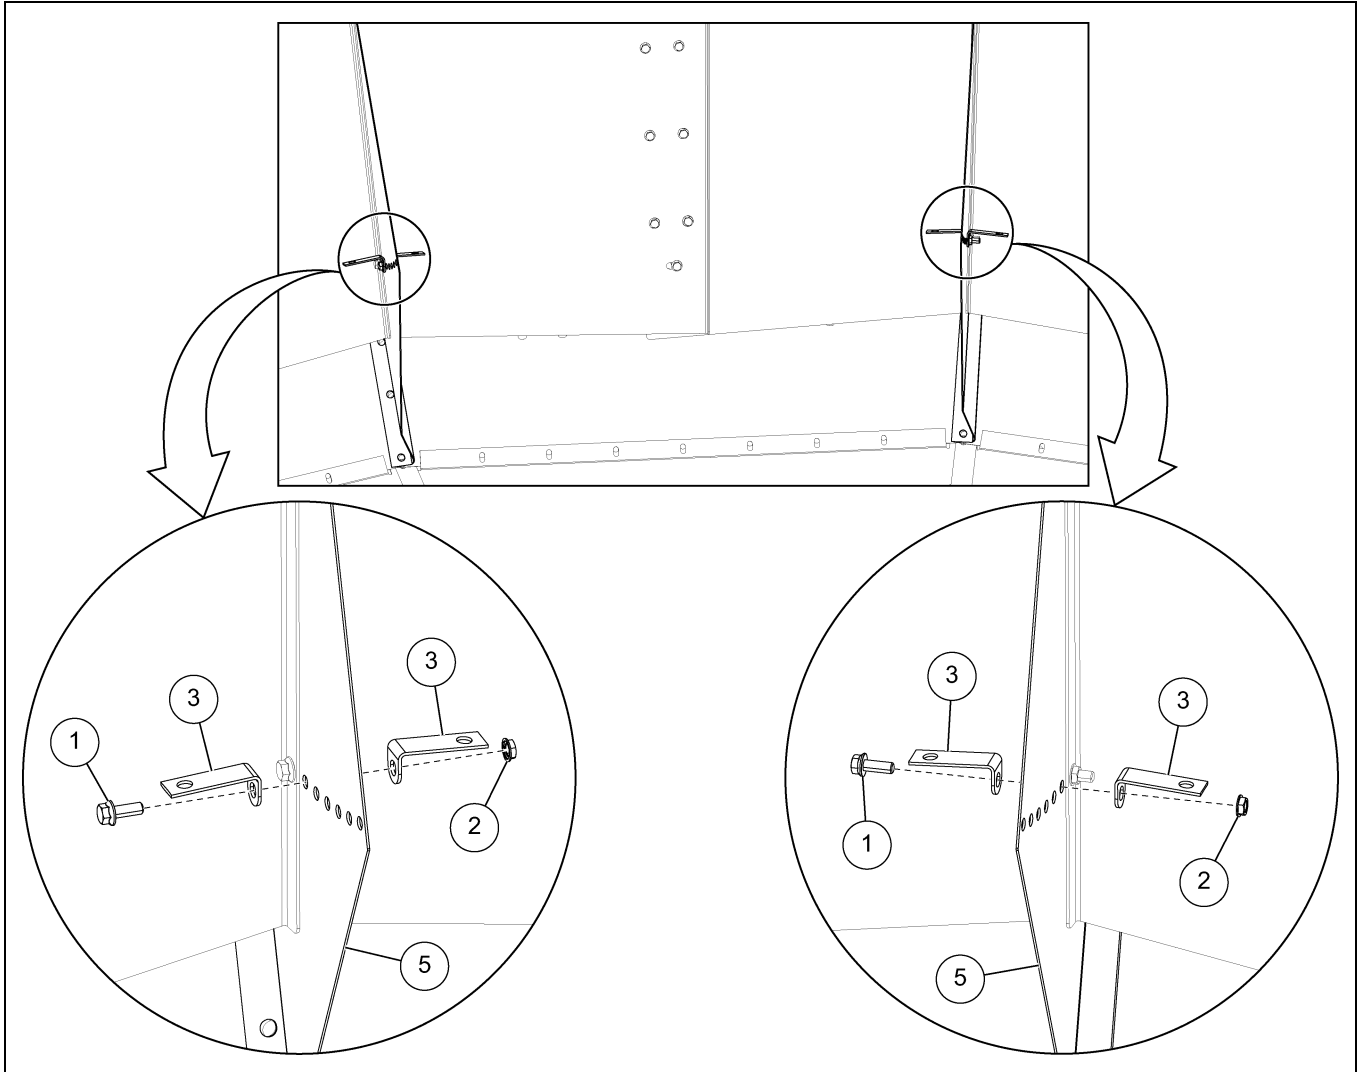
Installing the Brake Brace Clips to the Hopper Channel
